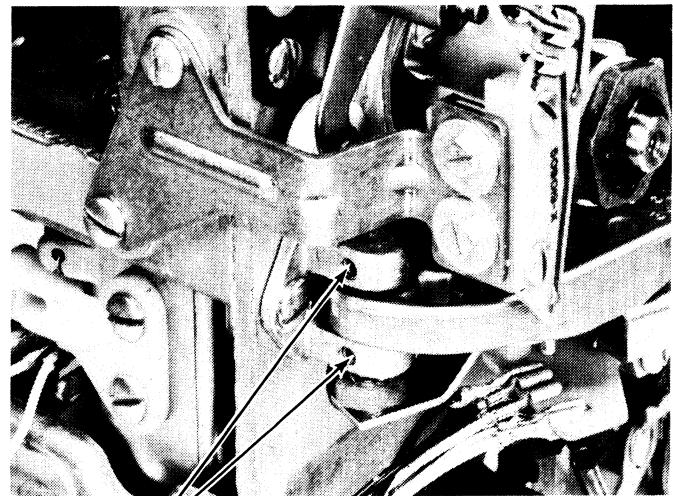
Shift Arm Removal (Printer Tilted Up)
